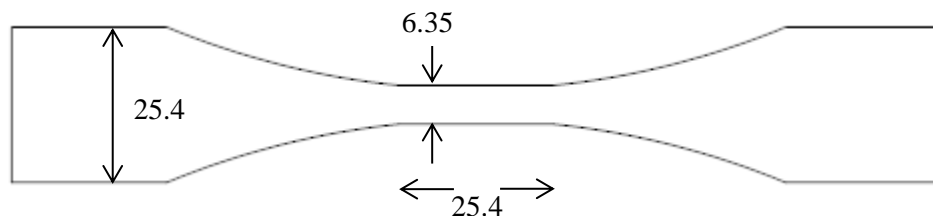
Dogbone test specimen shape, all dimensions in mm.
